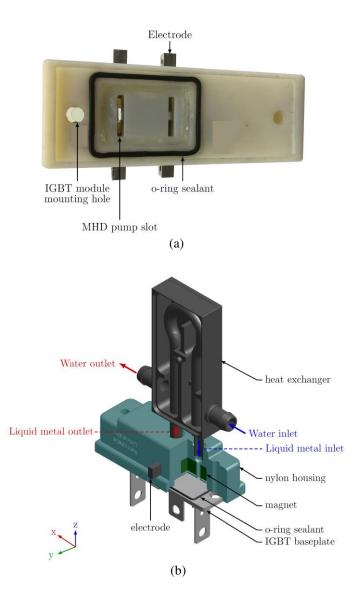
Detailed view of the active liquid metal cooler: (a) bottom view of the cooler and (b) isometric view of the cooler and IGBT module.
